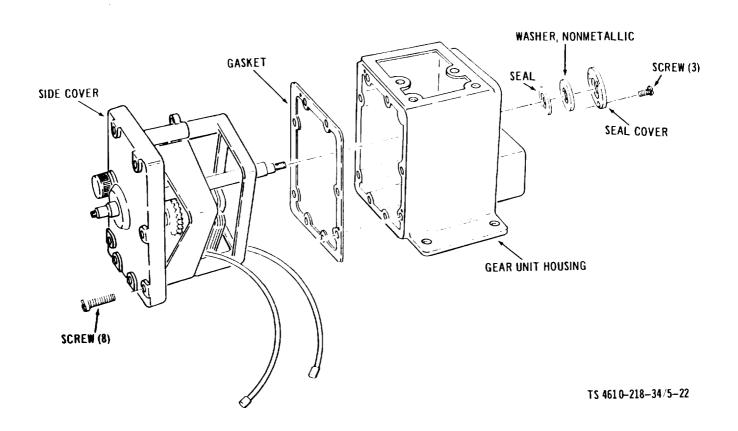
Chemical Solution Feeder Gear Unit, Removal and Installation
